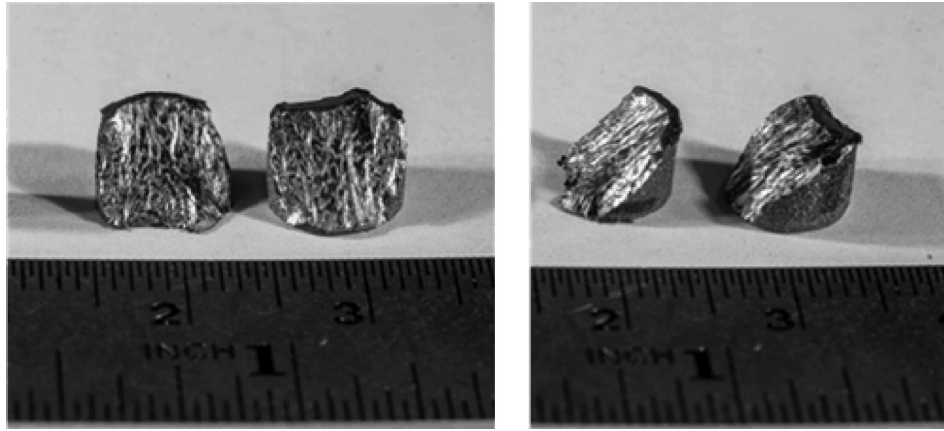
Typical dynamic fracture of fully dense printed Ti6Al4V specimen. Note the shear fracture pattern.
